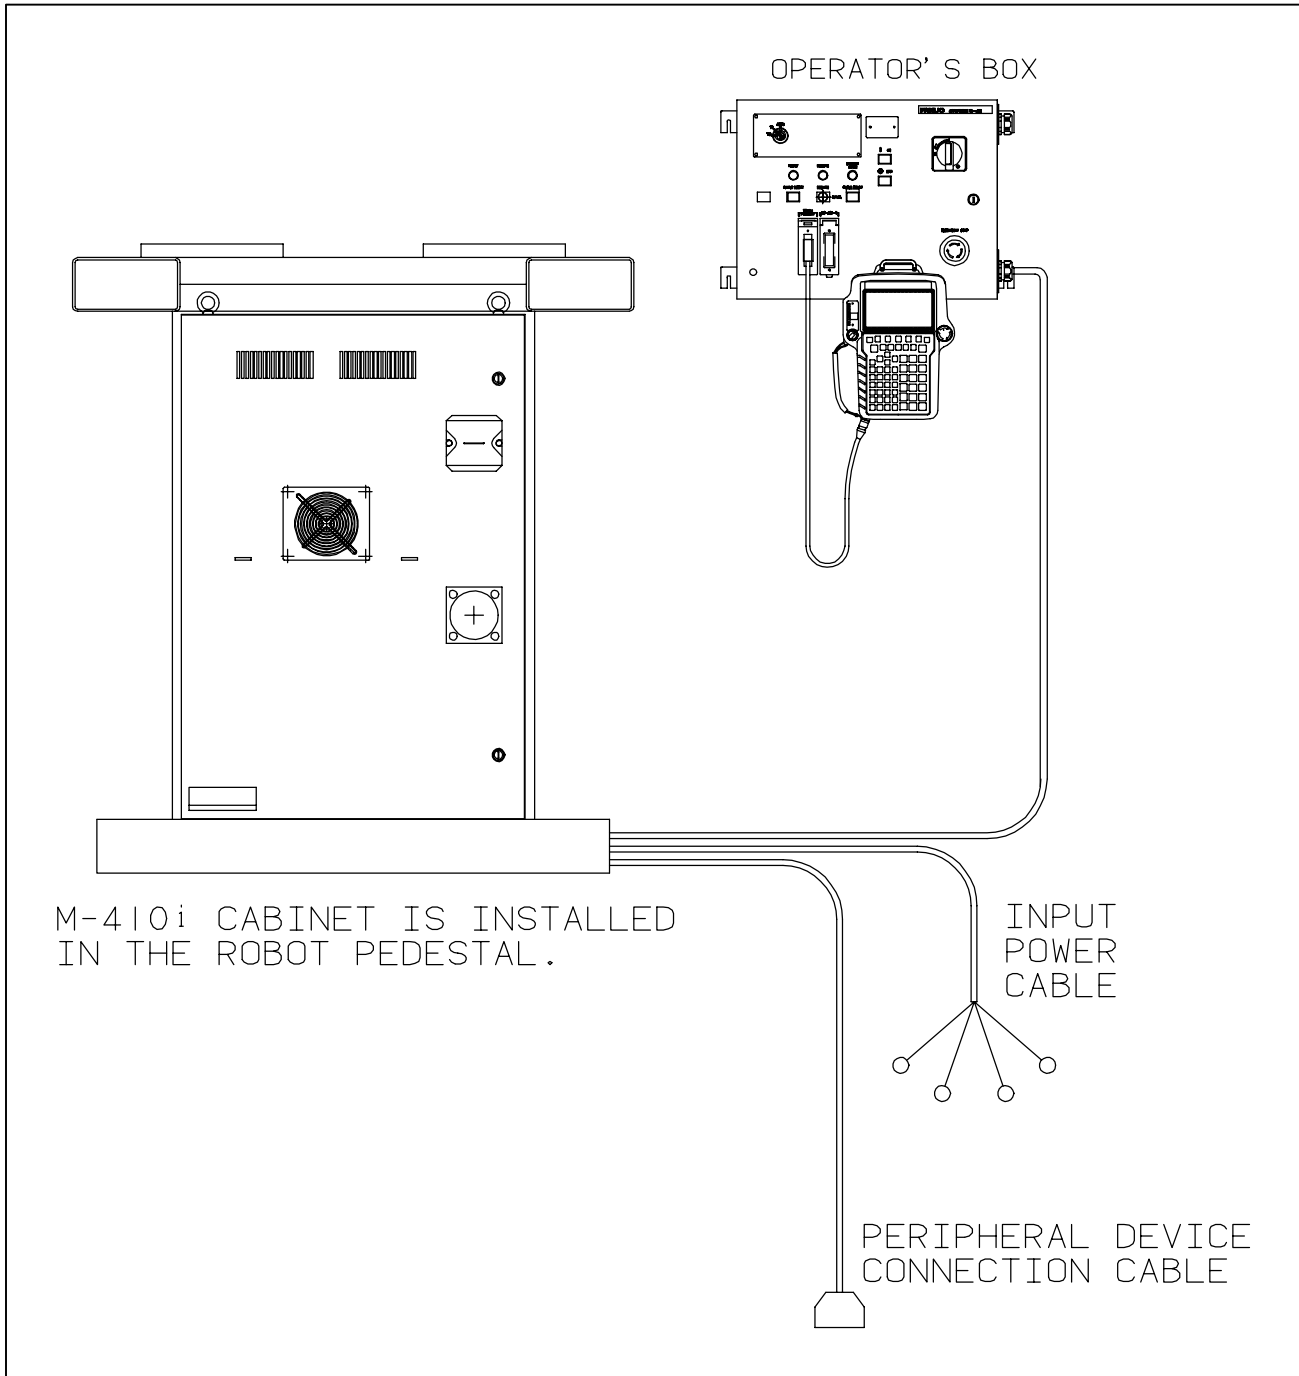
(b) Connecting Cables at Installation (M 410i/cabinet)
